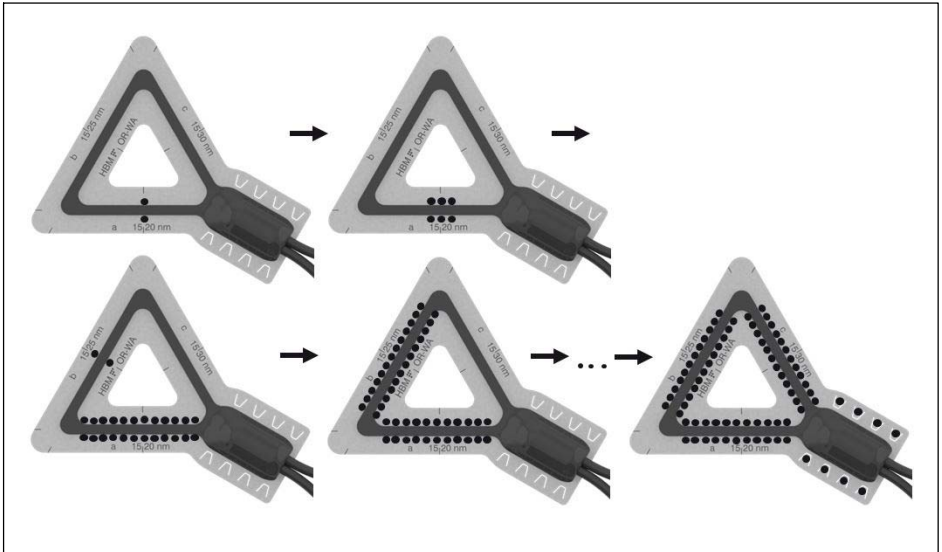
Setting welding spots onto OR-WA.
